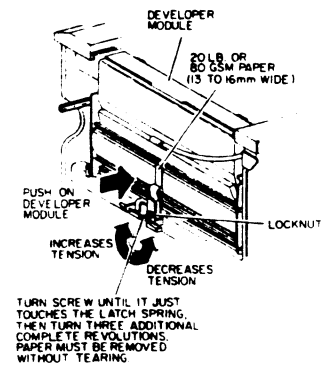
Checking/Adjusting the Force on Developer Module Latch
